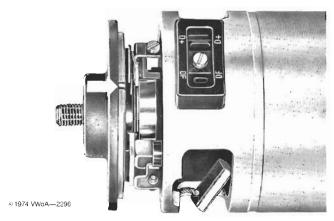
Notch (arrow) that must fit over projection on housing. The armature must turn freely following installation of the through bolts.
